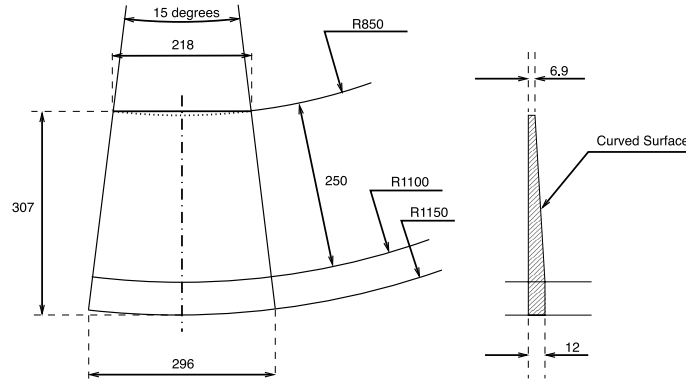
Technical drawing of one corrector ring segment. The dimensions are given in millimeters.
